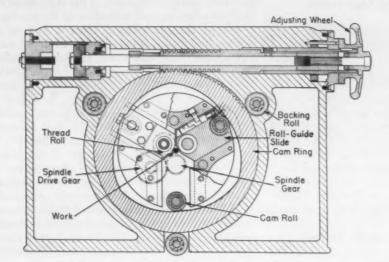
Functioning members in the working head of a horizontal three-die machine. Rotation of the cam-ring feeds the thread-rolling dies into the work blank.
